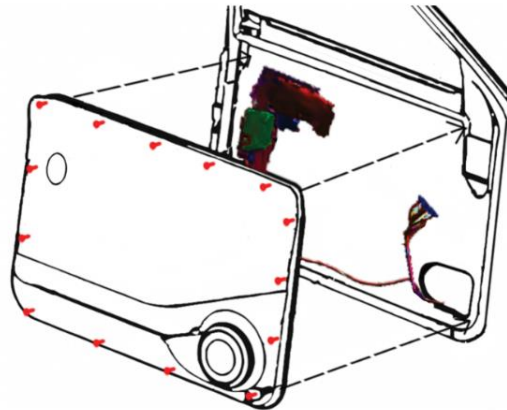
Illustration of door module assembly (DALL-E and Adobe Photoshop)
